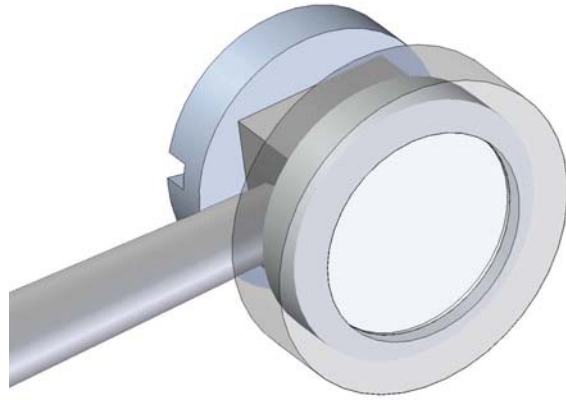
A CAD image of large crystal holder attached to the rotor. This enables 12.7 mm diameter crystals to be mounted to the rotor tips. The crystals are held between a threaded aluminum circular plate and a titanium locking ring, exposing a 9 mm diameter region of the crystal. The circular plate connects via a threaded hole to an adapter, which fits in the rotor where the smaller crystals would sit. Figure Courtesy Max Riedel.
